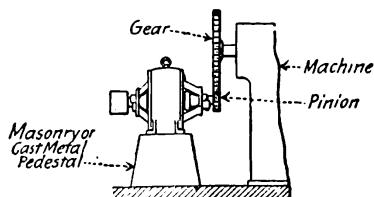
Motor mounting for gear drive (no limitation to center distance).
